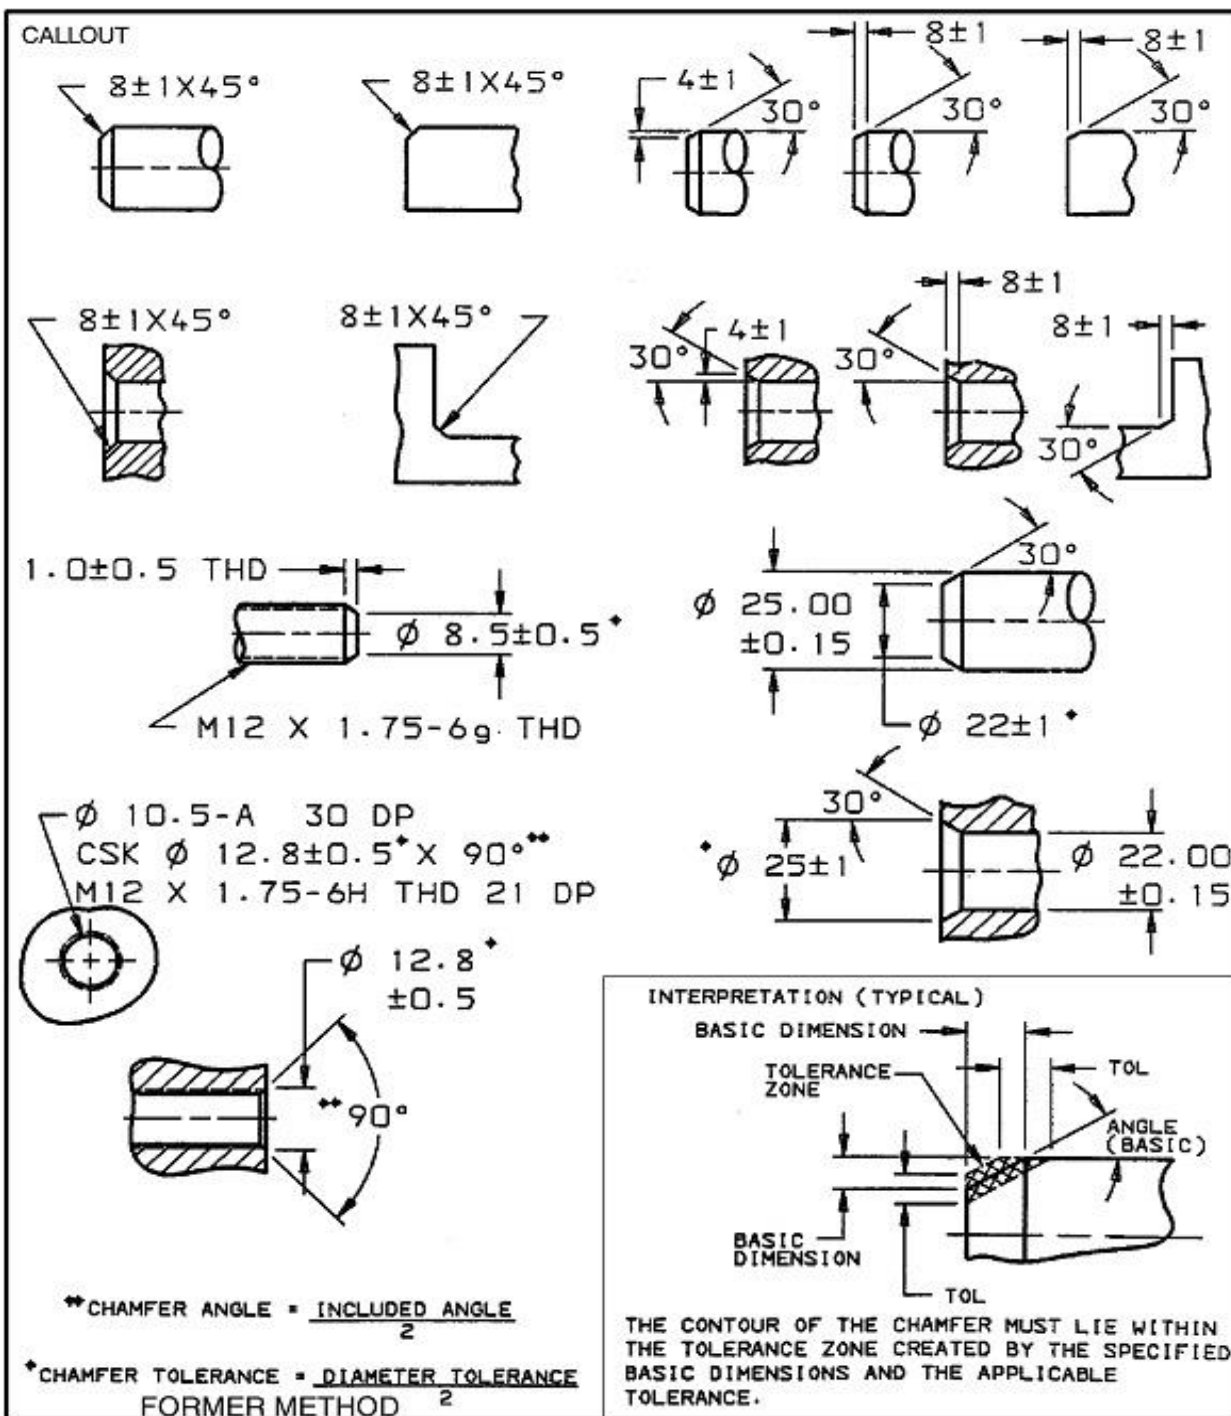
Chamfer Tolerance Zone (Continued)
